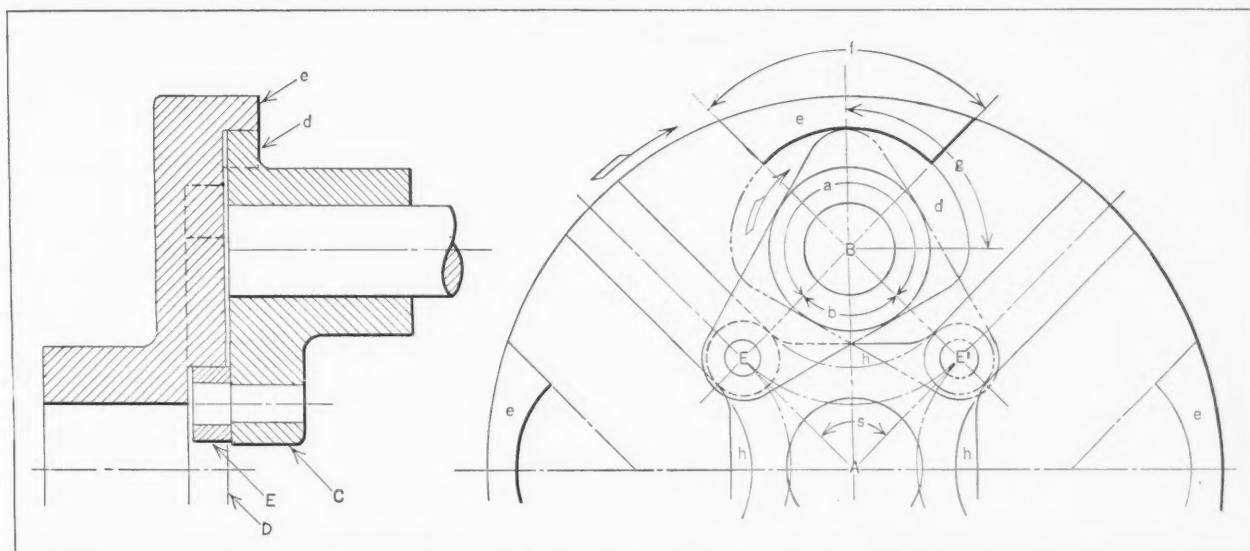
Locking Arrangement Employed on Inverse Geneva Wheel Mechanism
